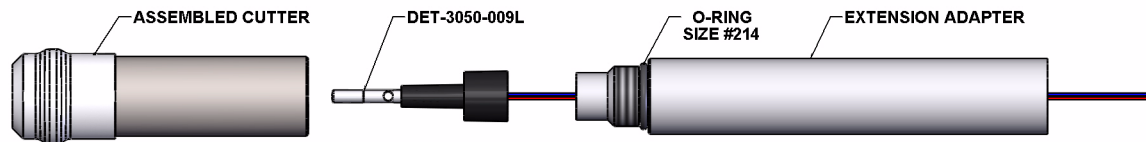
Exploded Arming View of Tubing Cutter Using DET-3050-009L
